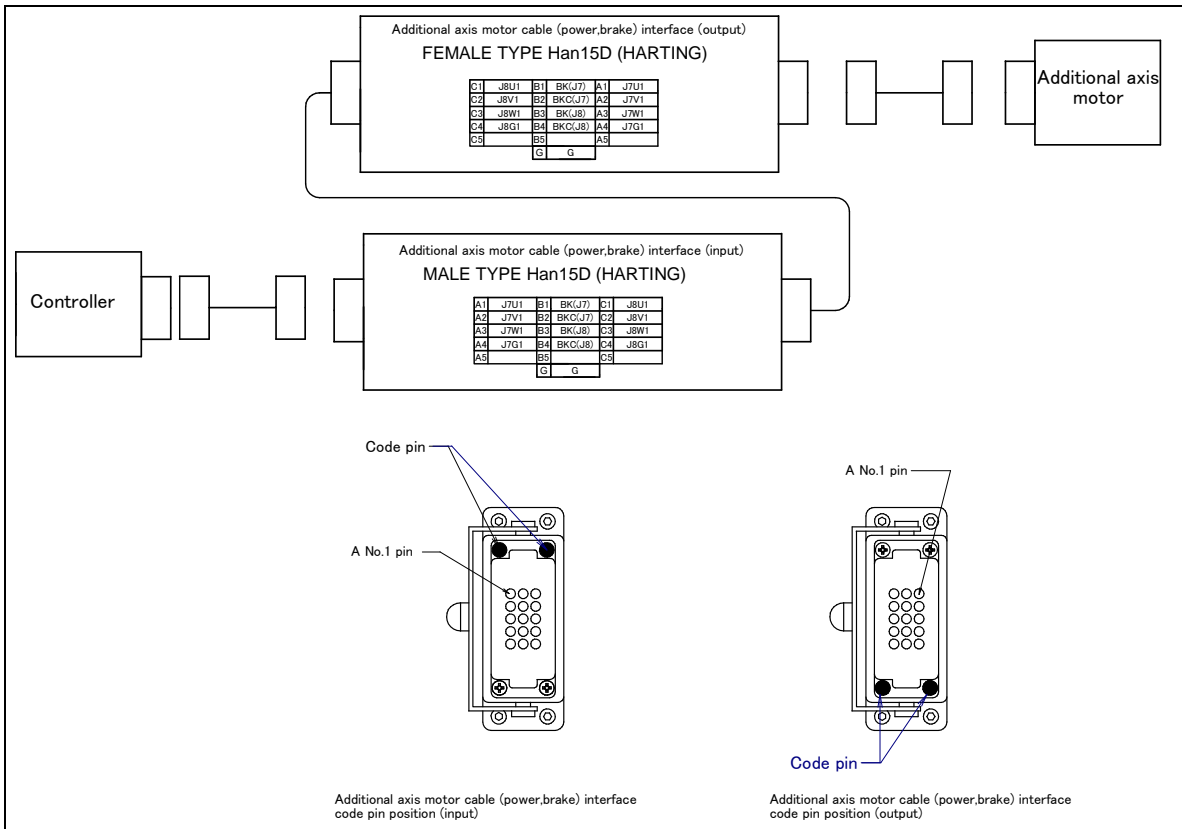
(v) Pin layout and code pin position of the additional axis (2-axis) motor cable (power and brake cables) (ARM) interface and layout position of the code pin (option)
